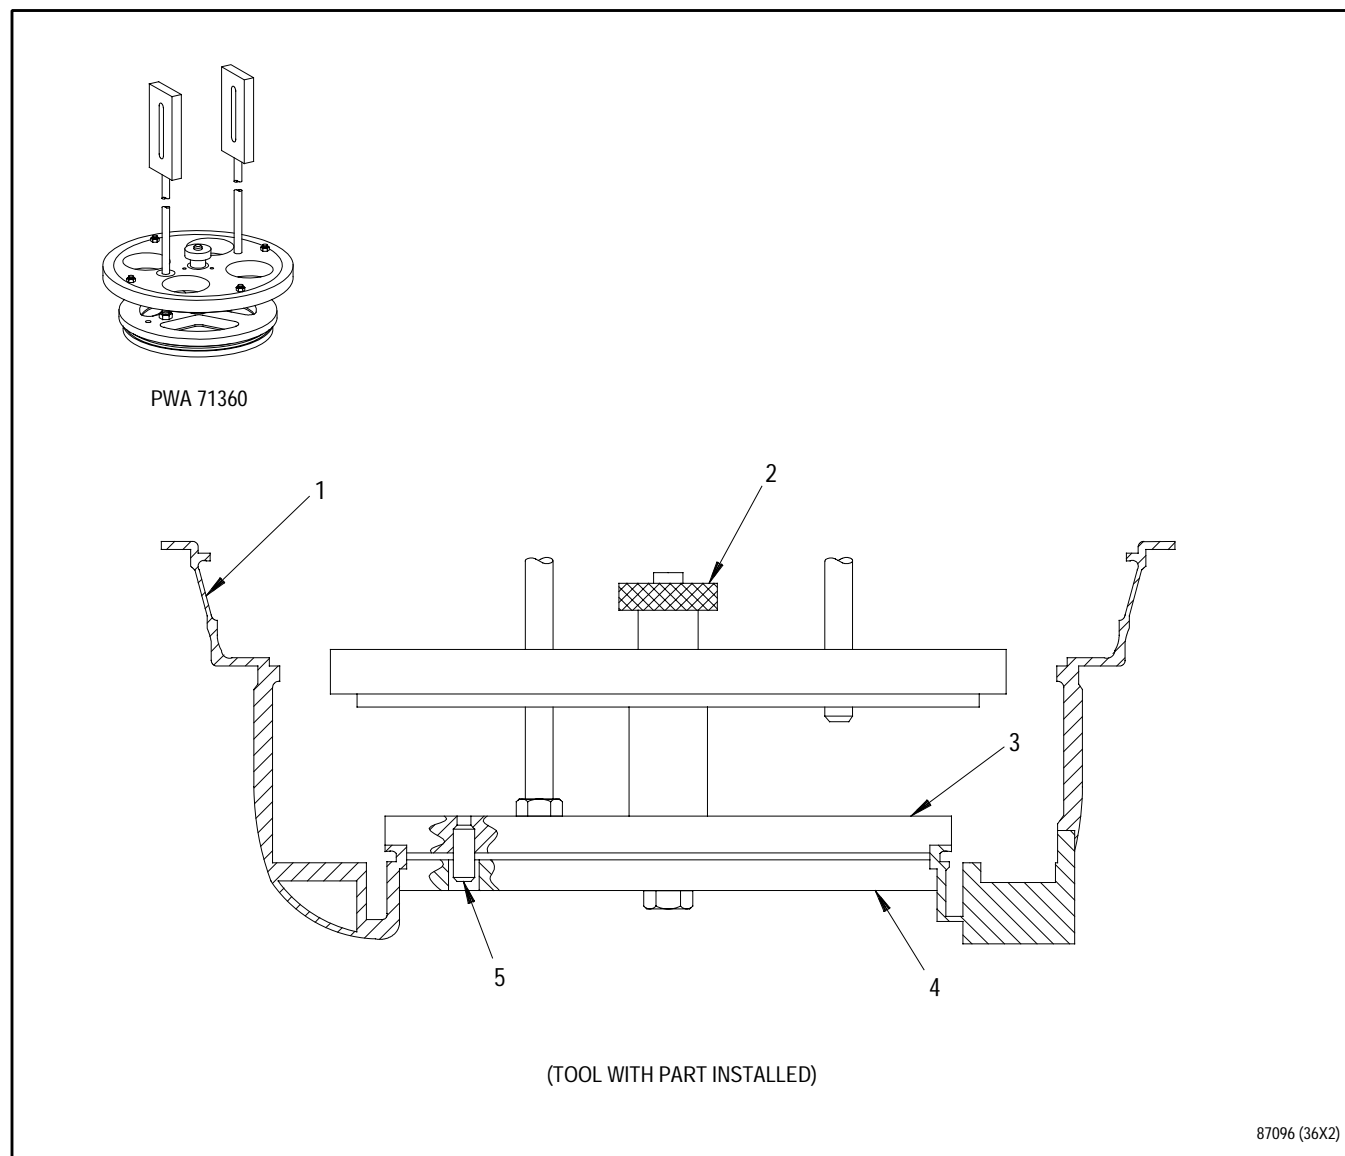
No. 4 Bearing Front Seal Support Assembly - No. 4 bearing Housing
